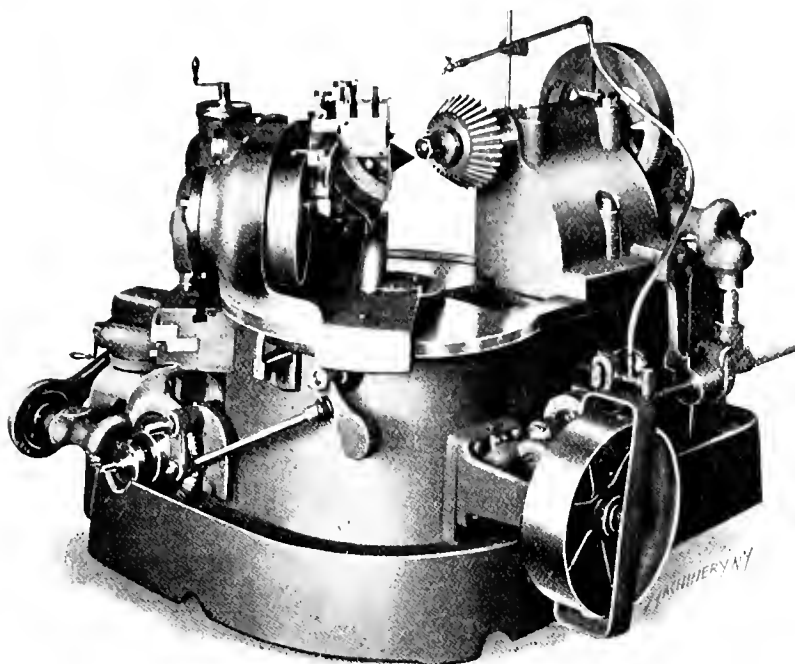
Gleason Templet-controlled Bevel Gear Planing Machine.
